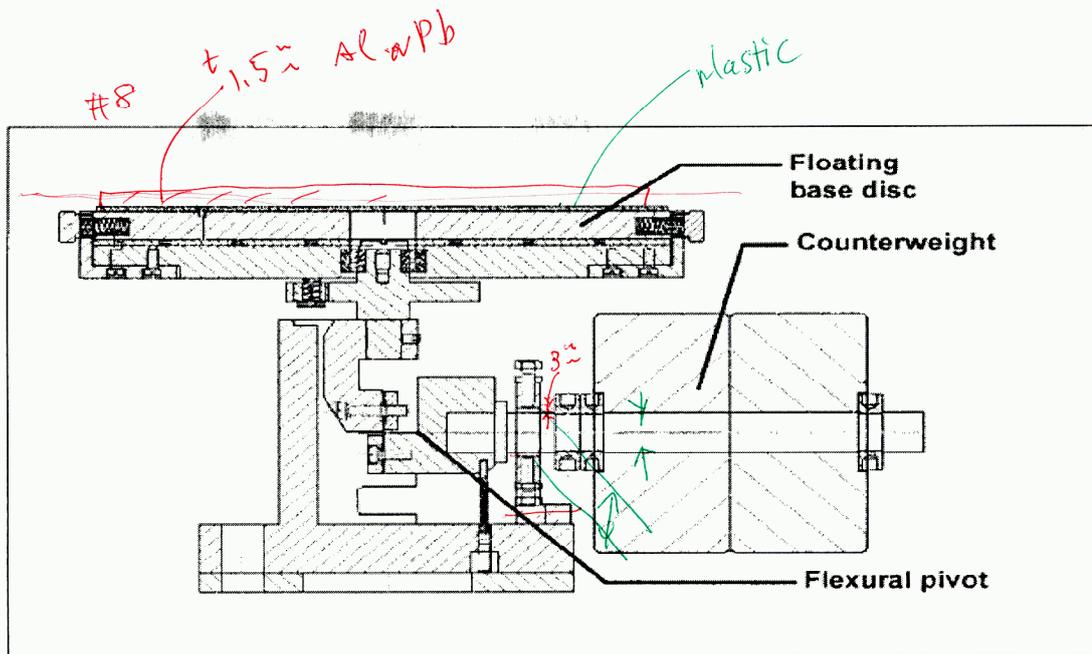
Axial support point (see drawing 161499:001.14(1)).
